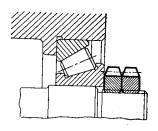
Lock nut used to secure axial adjustment nut in taper-roller bearing assembly
